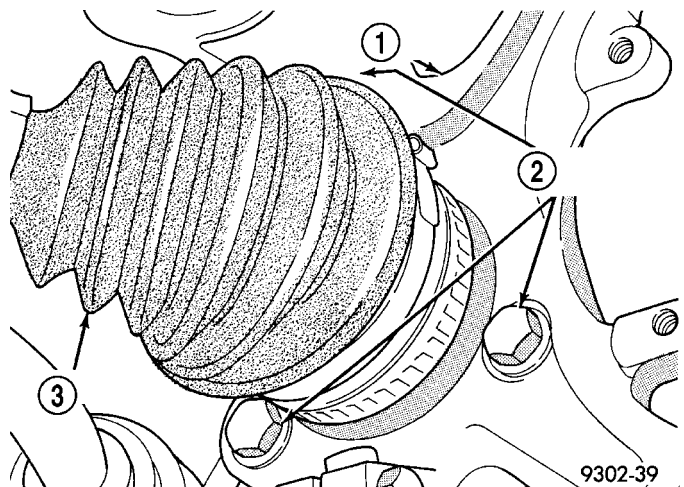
Hub And Bearing Assembly Retaining Bolts
